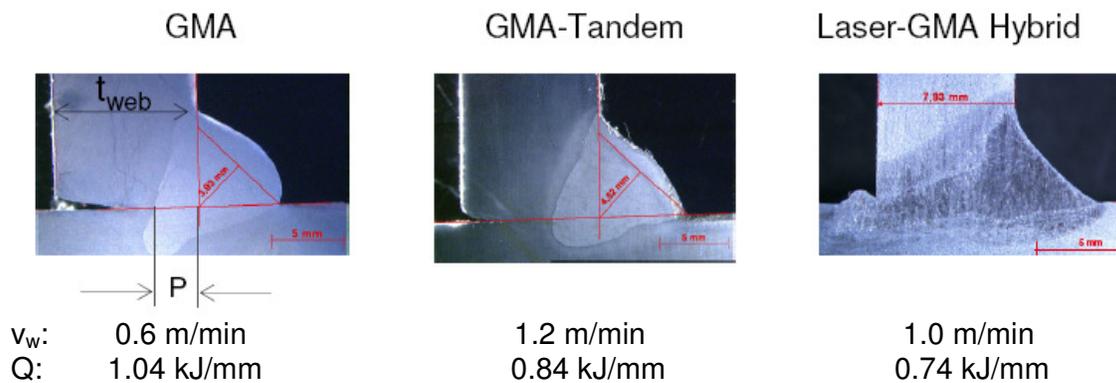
Fillet weld penetration ratio applying different welding processes
